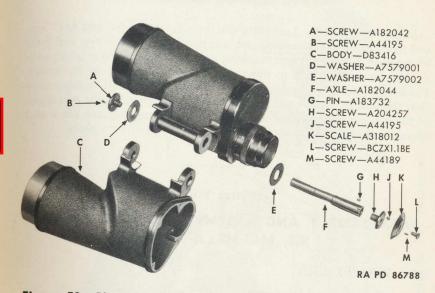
Binocular M17—Hinge Pin Assembly Disassembled
